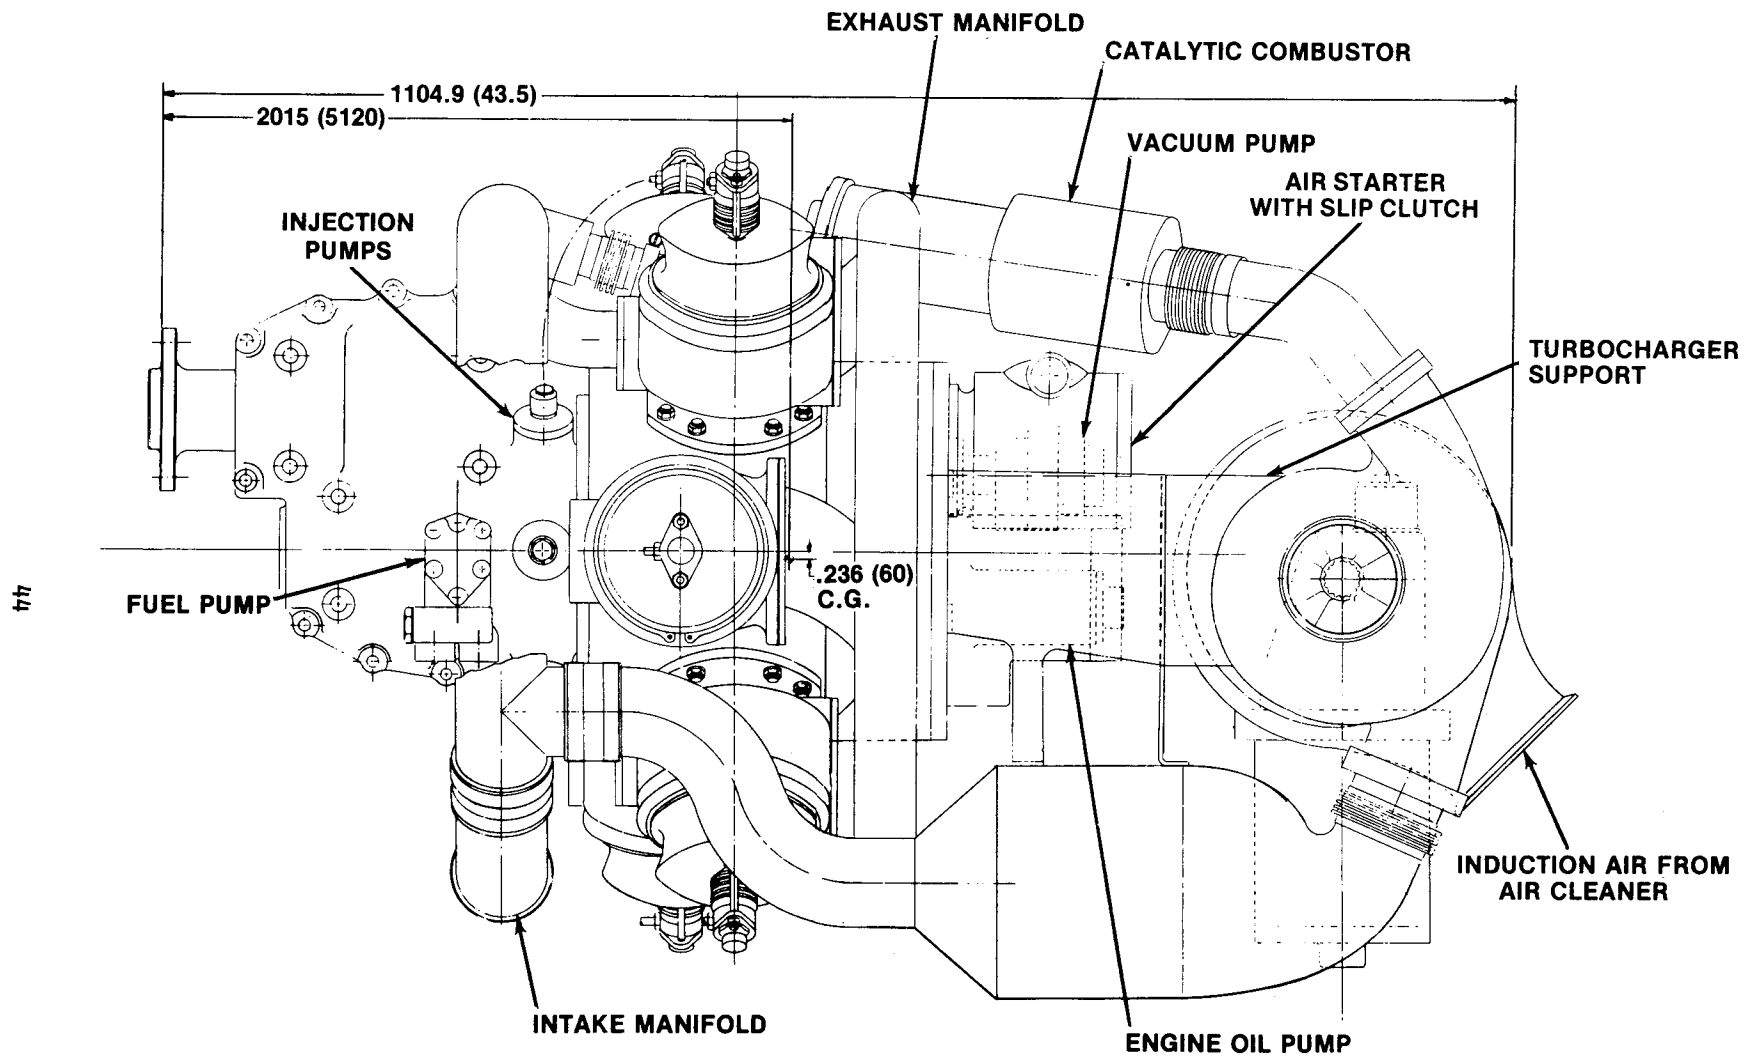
298 kW AIRCRAFT DIESEL—SIDE VIEW
